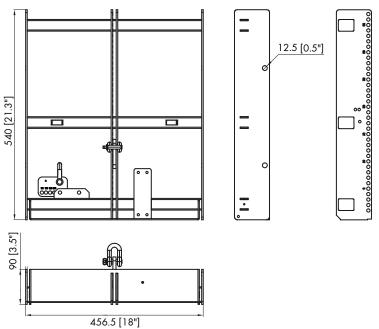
Z5370 T Flying frame dimension in mm [inch]
